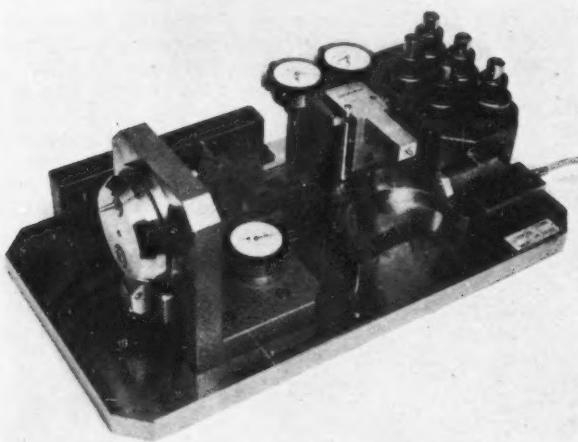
Mercer Inspection Fixture with Three Dial Gauges for Checking Coarser Limit Dimensions, and One Air Gauge Unit for a Close-limit Dimension
